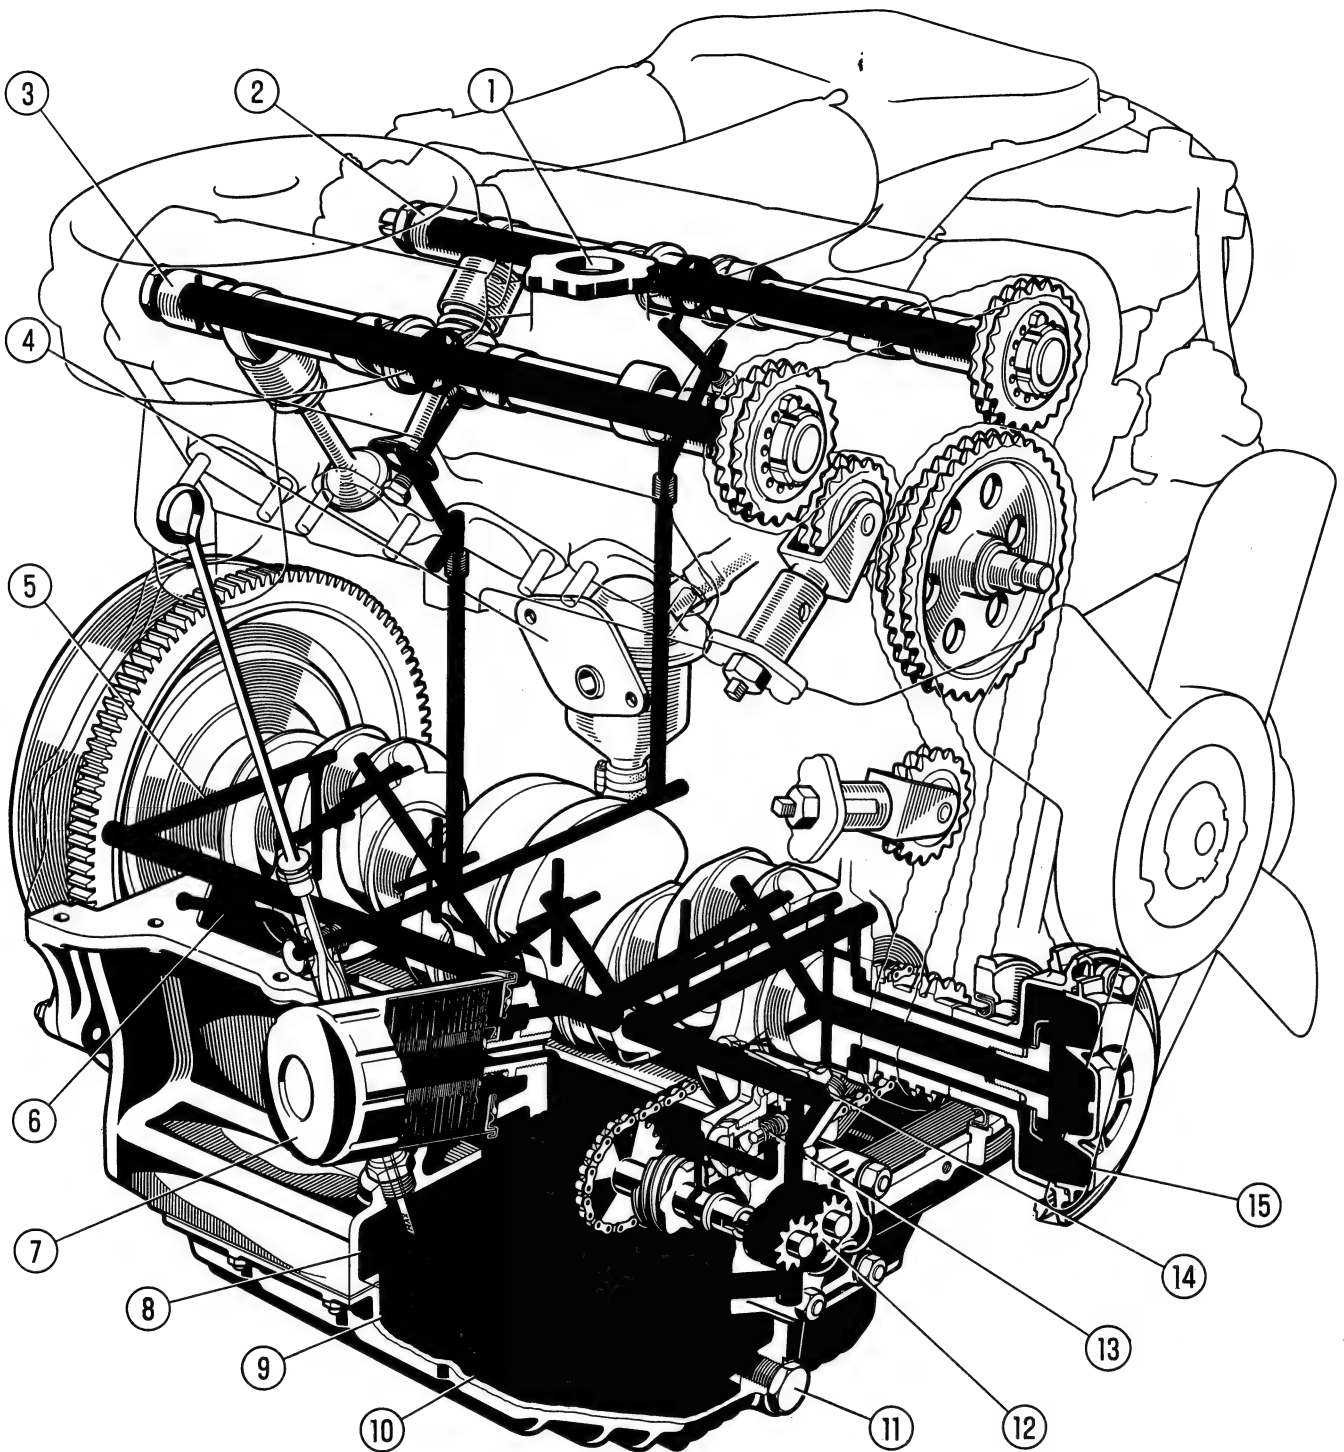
Cut-away and phantom view of 118 B.000 engine lubrication system.
